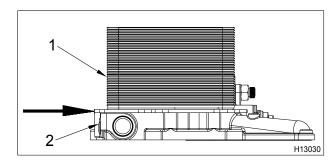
Separation of cooler heat exchanger from oil cooler housing base
